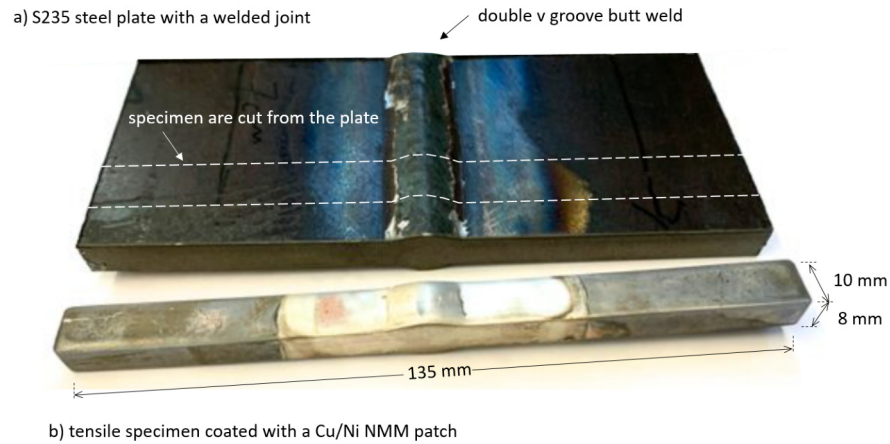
Production process of the preliminary specimens; a) the welded plate; b) the coated tensile specimen [68]
